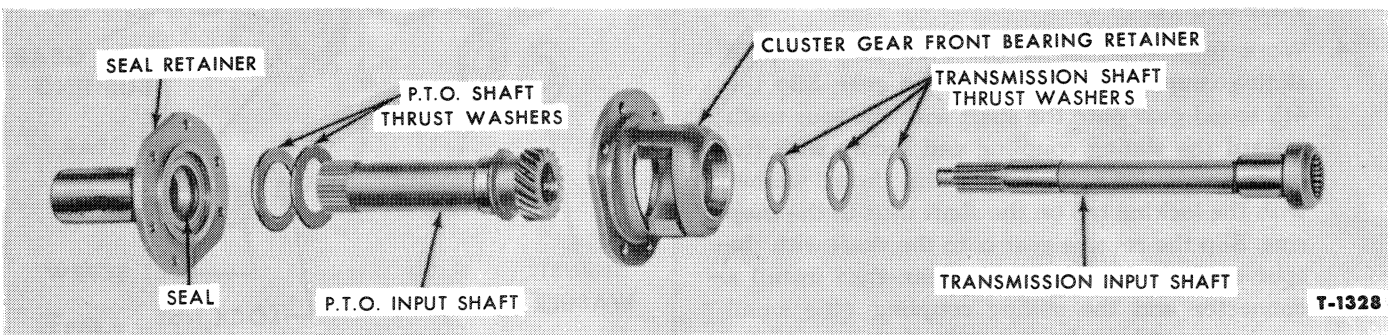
Input Shafts and Retainer for Double Clutch Transmission
